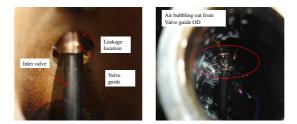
Gap between Valve guide and its bore in Cylinder head leading to leakage
